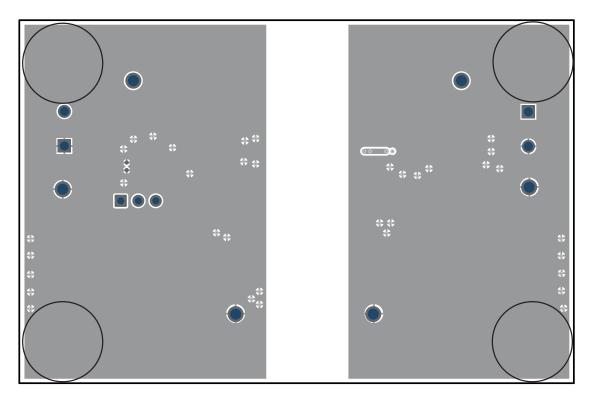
ISO7741TADWEVM PCB Layout - Composite Top View
